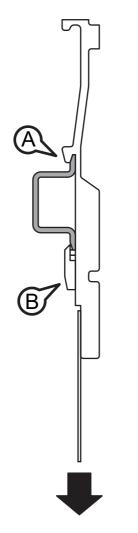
Side view of a DIN rail (shown in gray) with an adapter plate fitted
